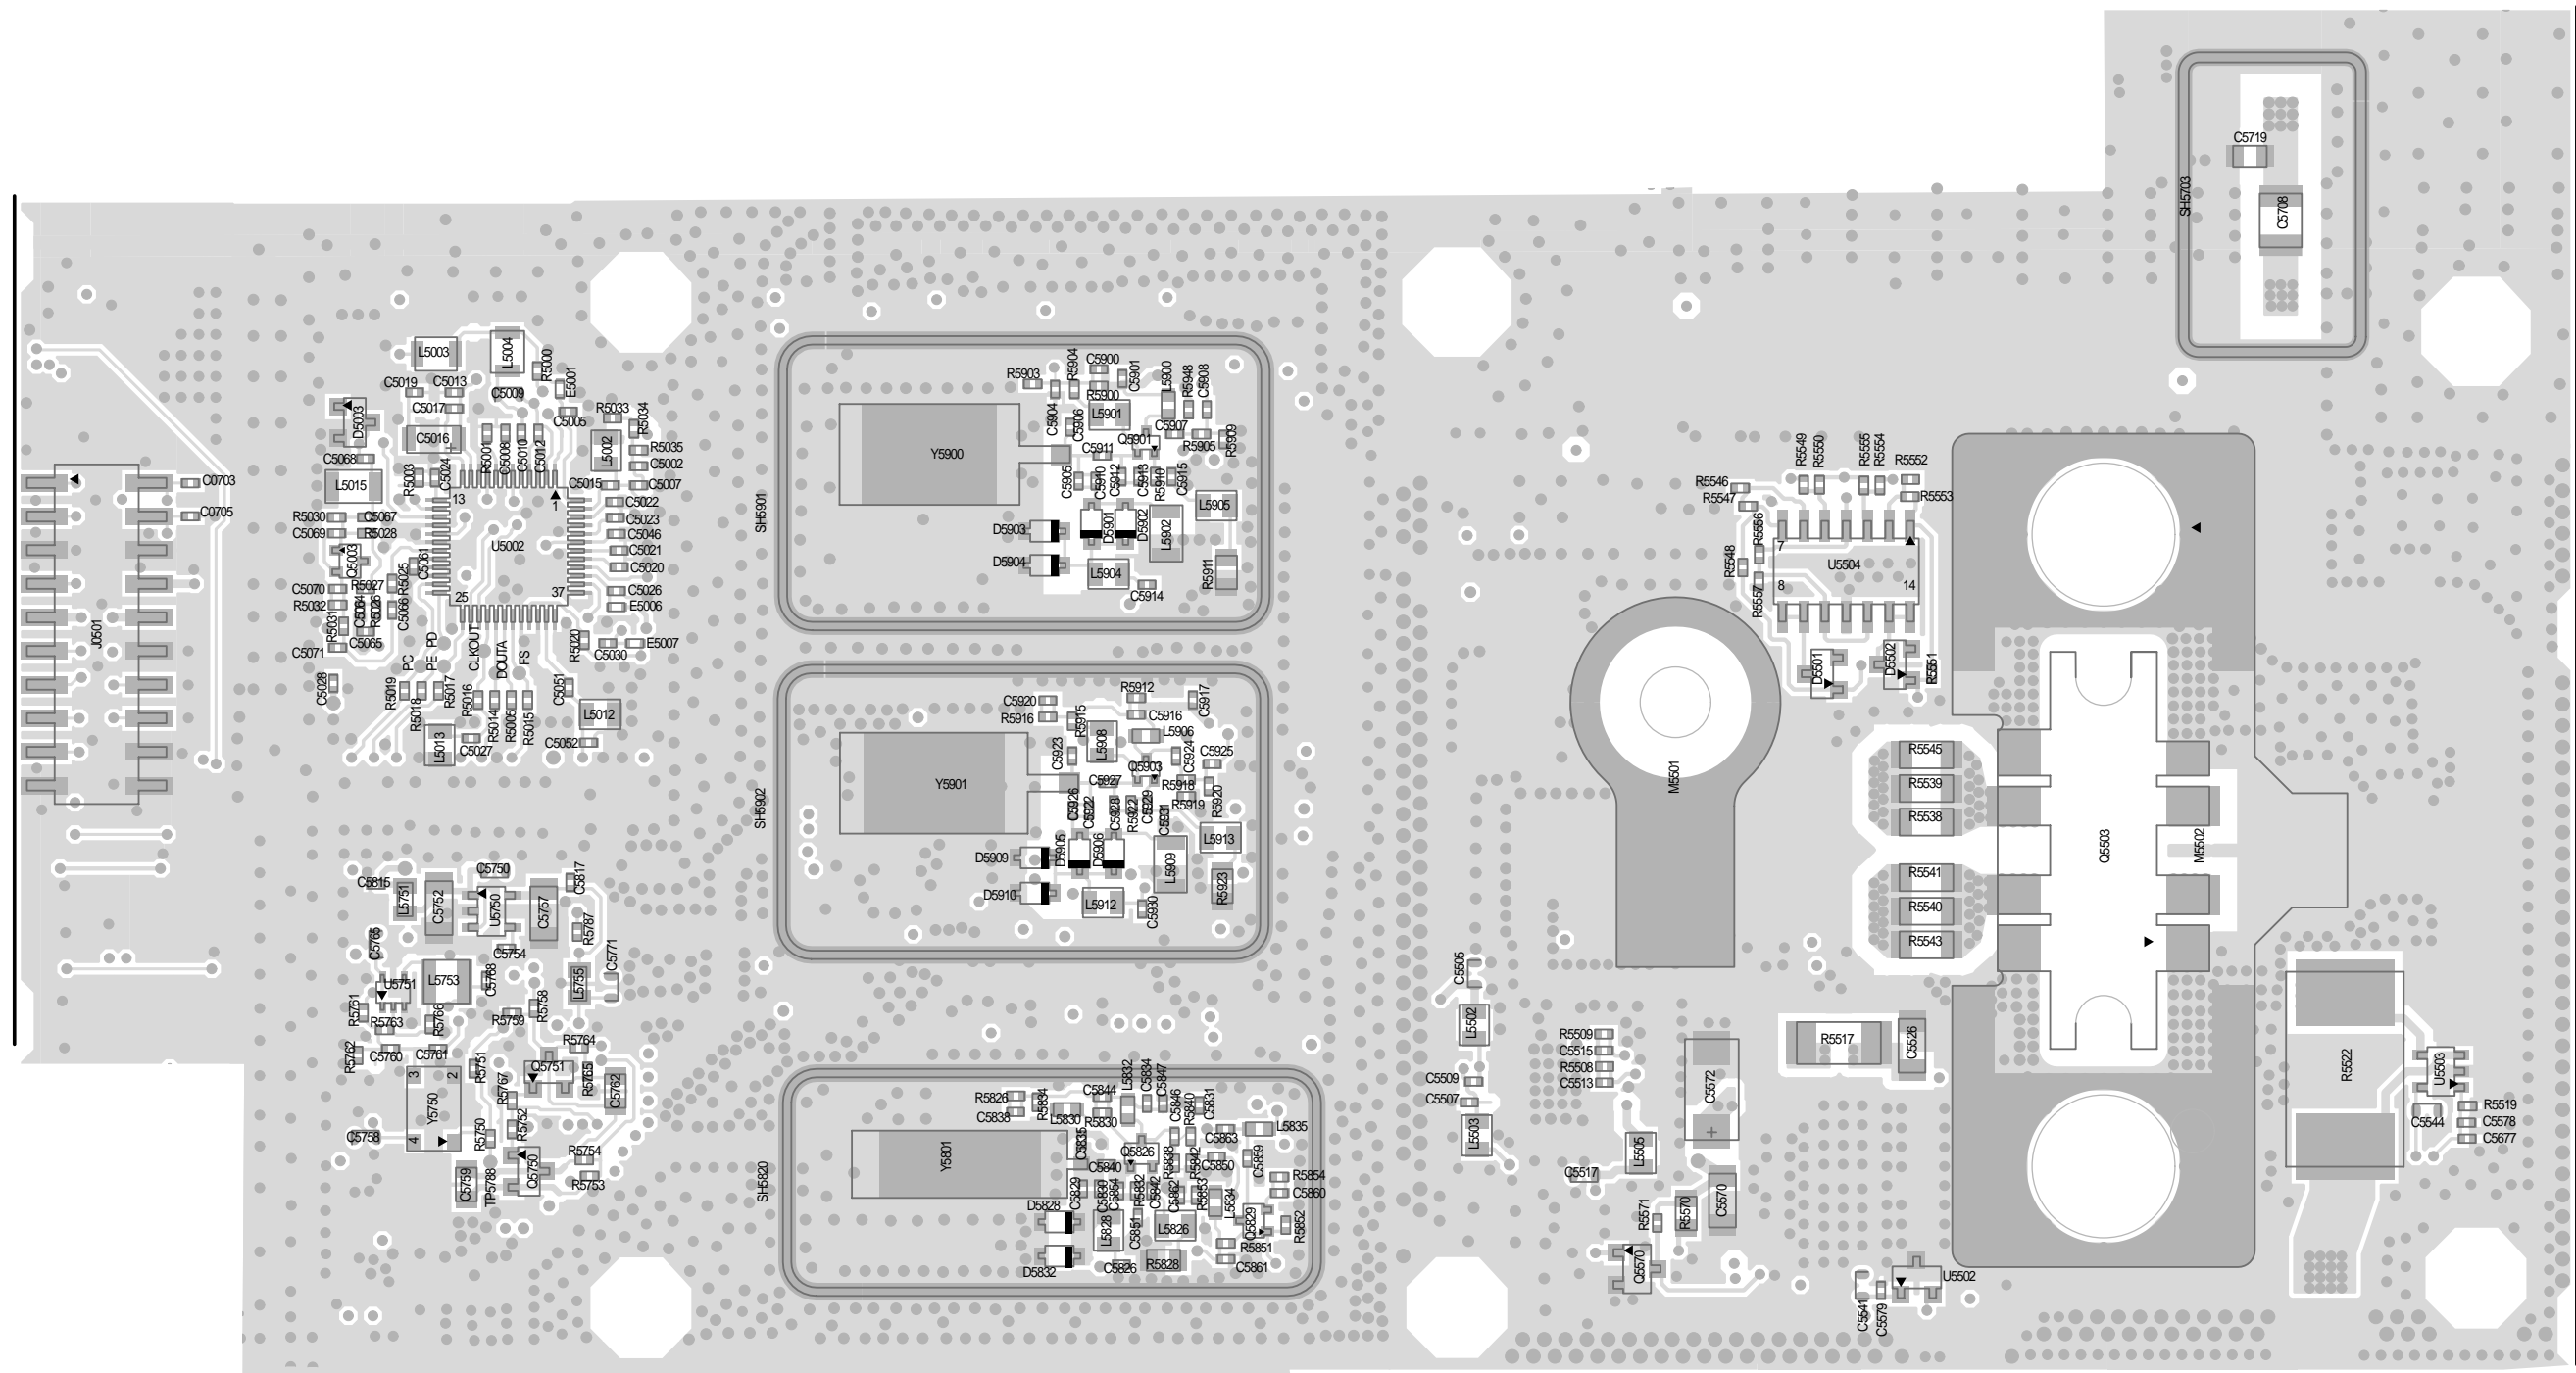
HUE4040A Main Board Layout—Side 1 Middle
